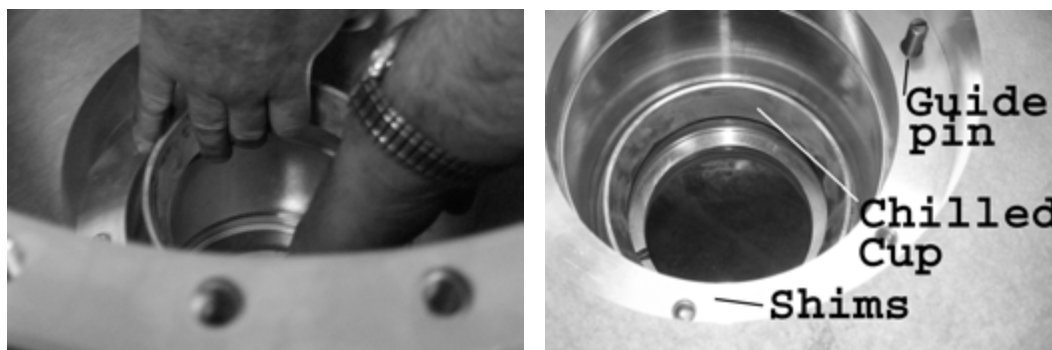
Install Chilled Bearing Cup (left), and Insert Guide Pins and Starting Shim Pack (right)
